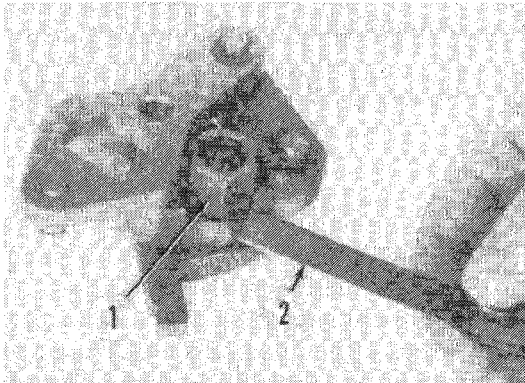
When assembling valve adjusting cam assembly, tighten nut (1) so gap between washer and valve link does not exceed 0.045 inch (1.14 mm).
